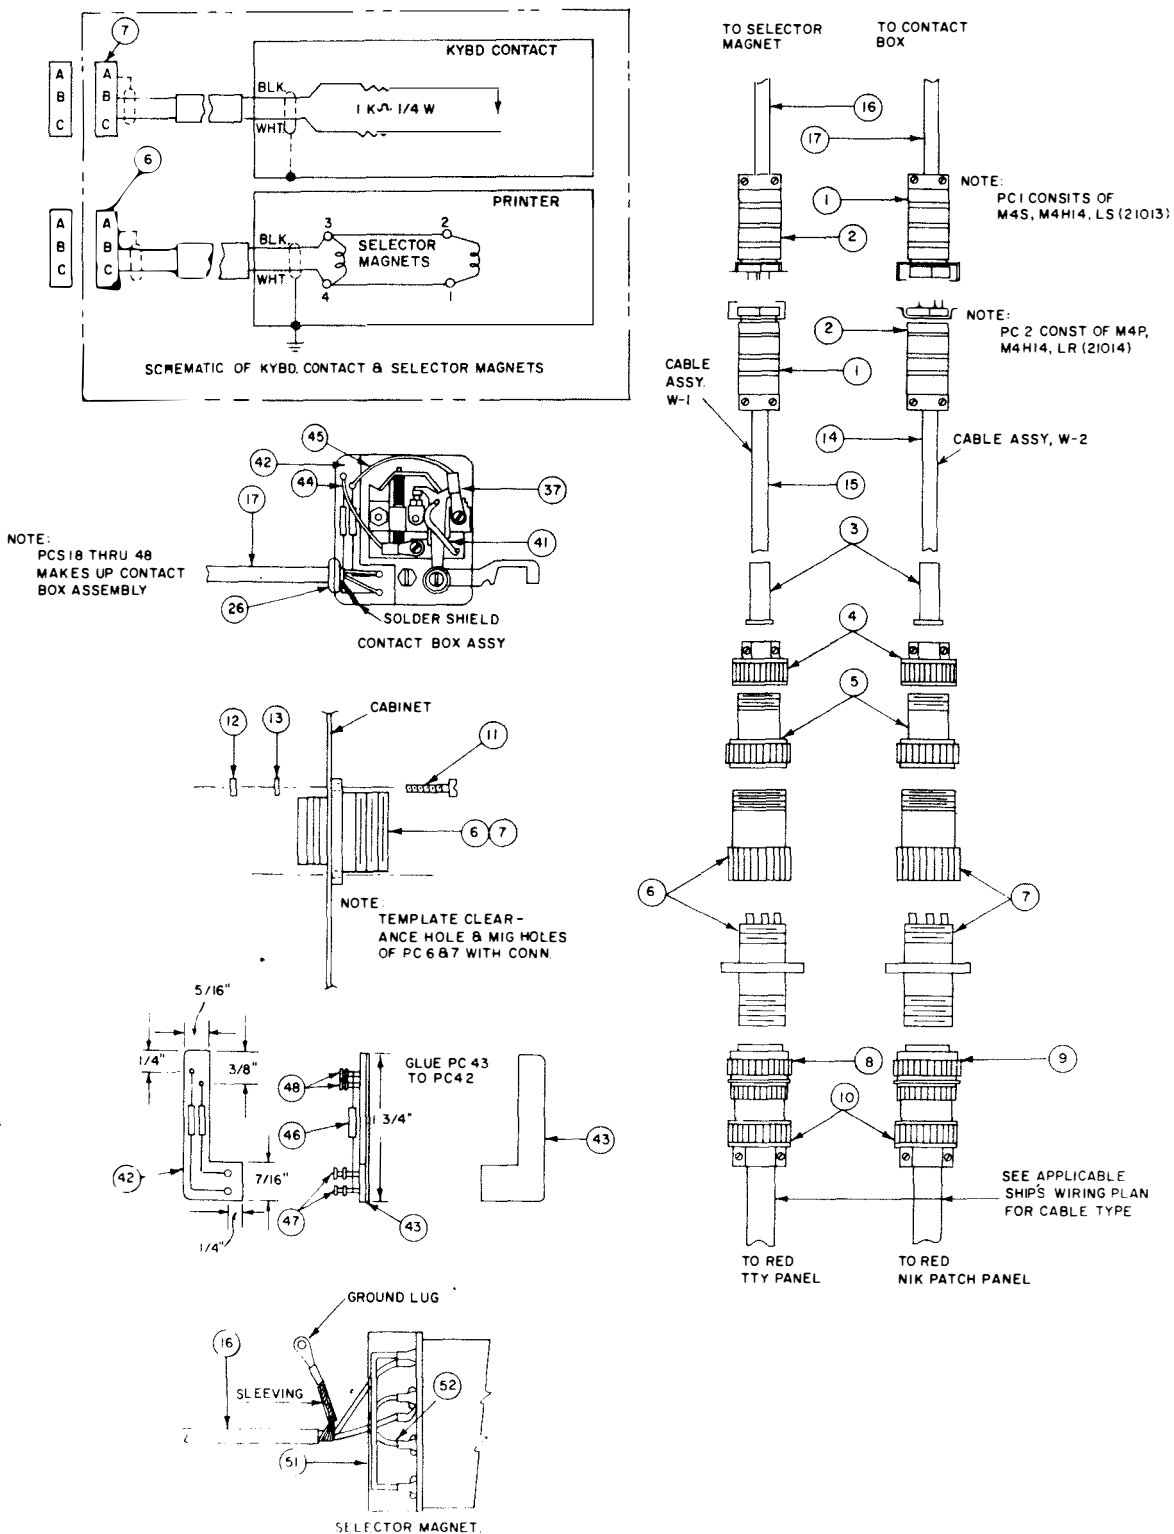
TT-47/UG Installation Drawing (Part 1)
